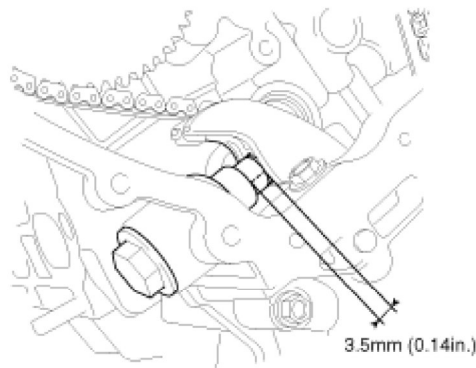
Identifying Distance Between Cylinder Head Surface & End Of Tensioner Plunger (1 Of 2)
